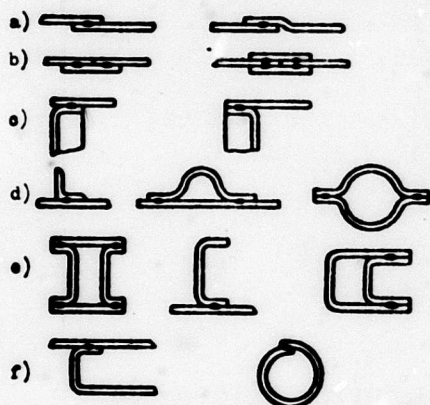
Types of welded joints and assemblies during ultrasonic welding: a) overlapping without hewing and with hewing; b) joint with one-side bilateral cover plate; c) flanging, internal and external; d) welded assemblies of open type; e) welded assemblies of half-open type; f) welded assemblies of semi-closed and closed type.
